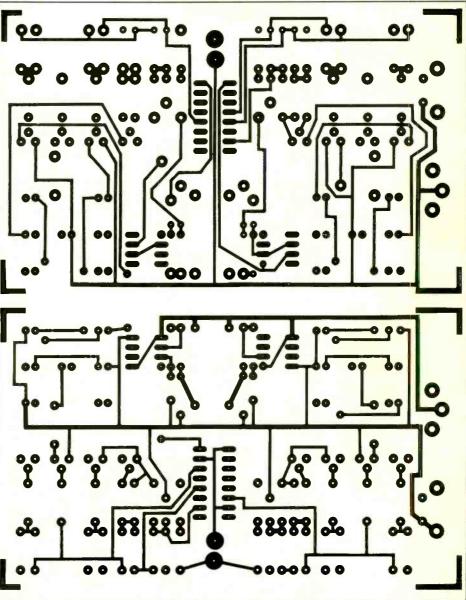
Actual-size etching-and-drilling guides for both sides of printedcircuit board.
